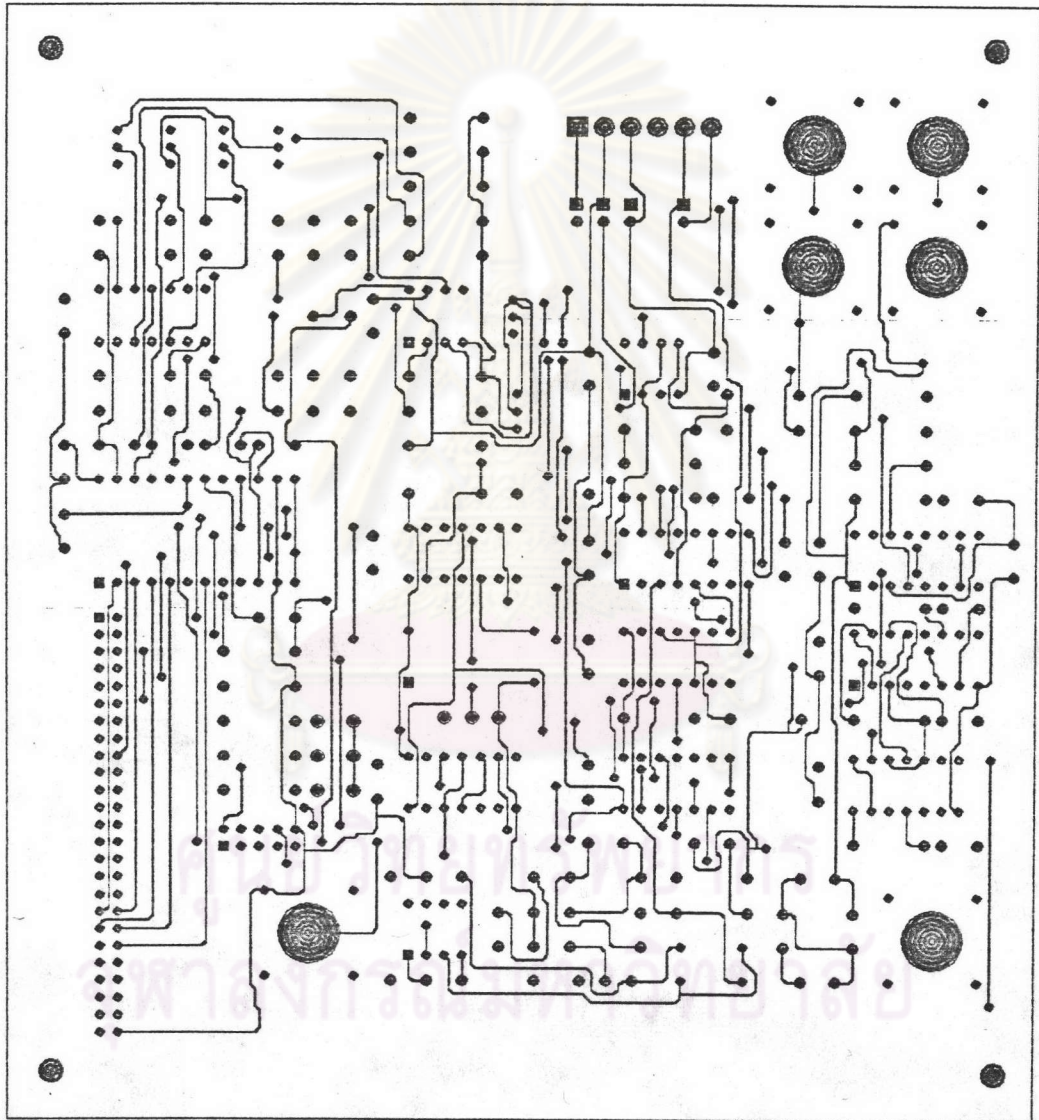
Solder side layout of TMS320 IO part PCB.
